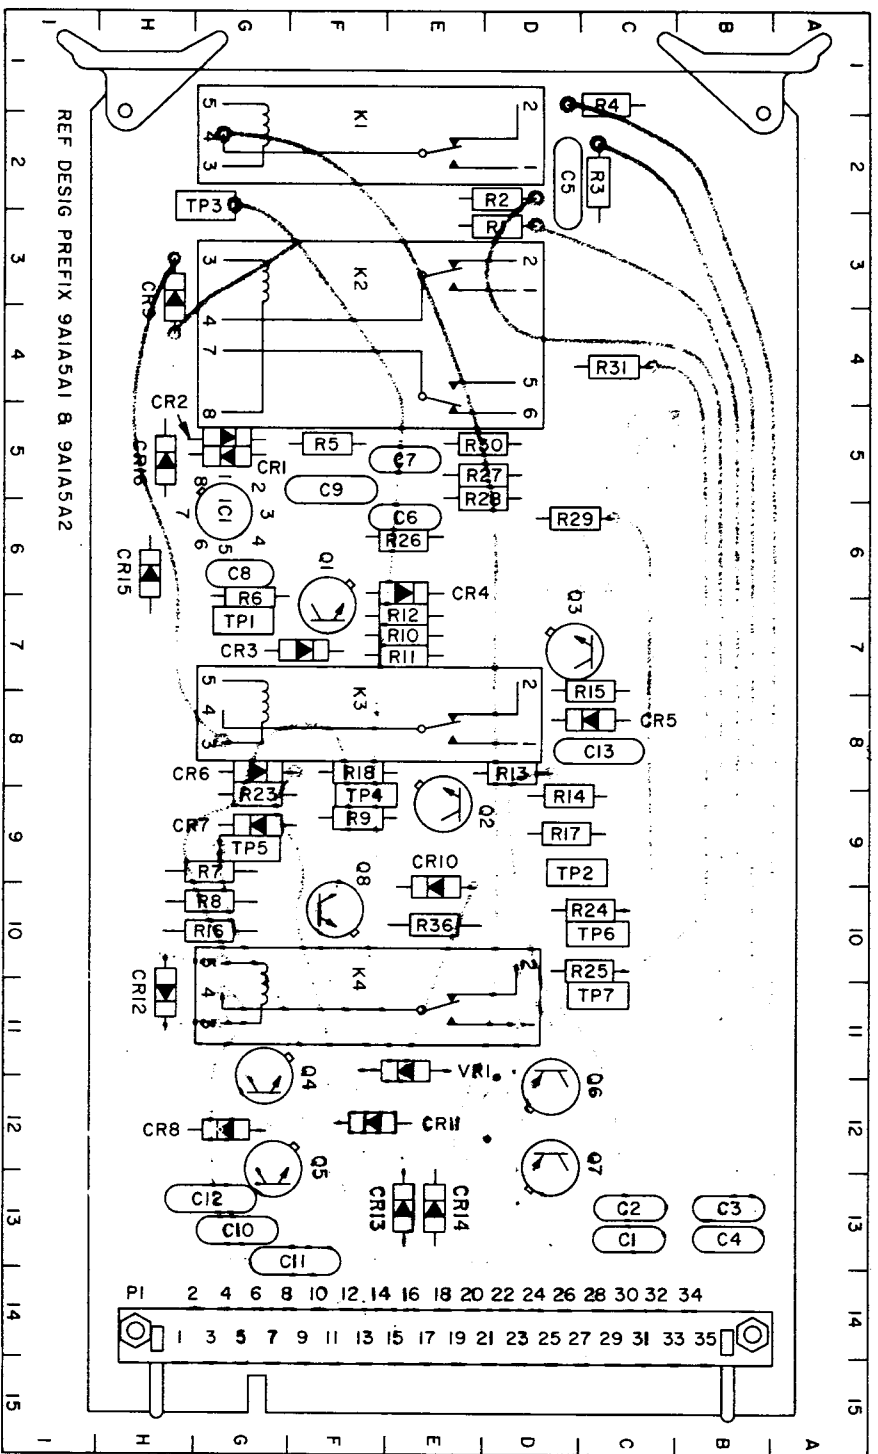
10 KW PA, Detector PCB Assembly 9A1A3A1, Component Locations
